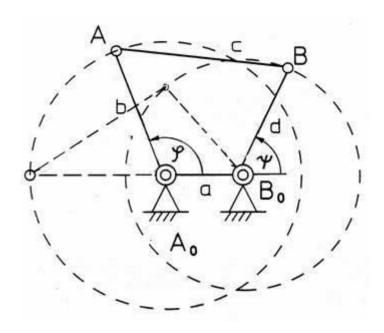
a) Double crank (Four-bar linkage) A, B crankpins; $A_0 \;\; , B_0 \;\; rocker$ bearings $\phi, \; \Psi \;\; crank \; angles$
